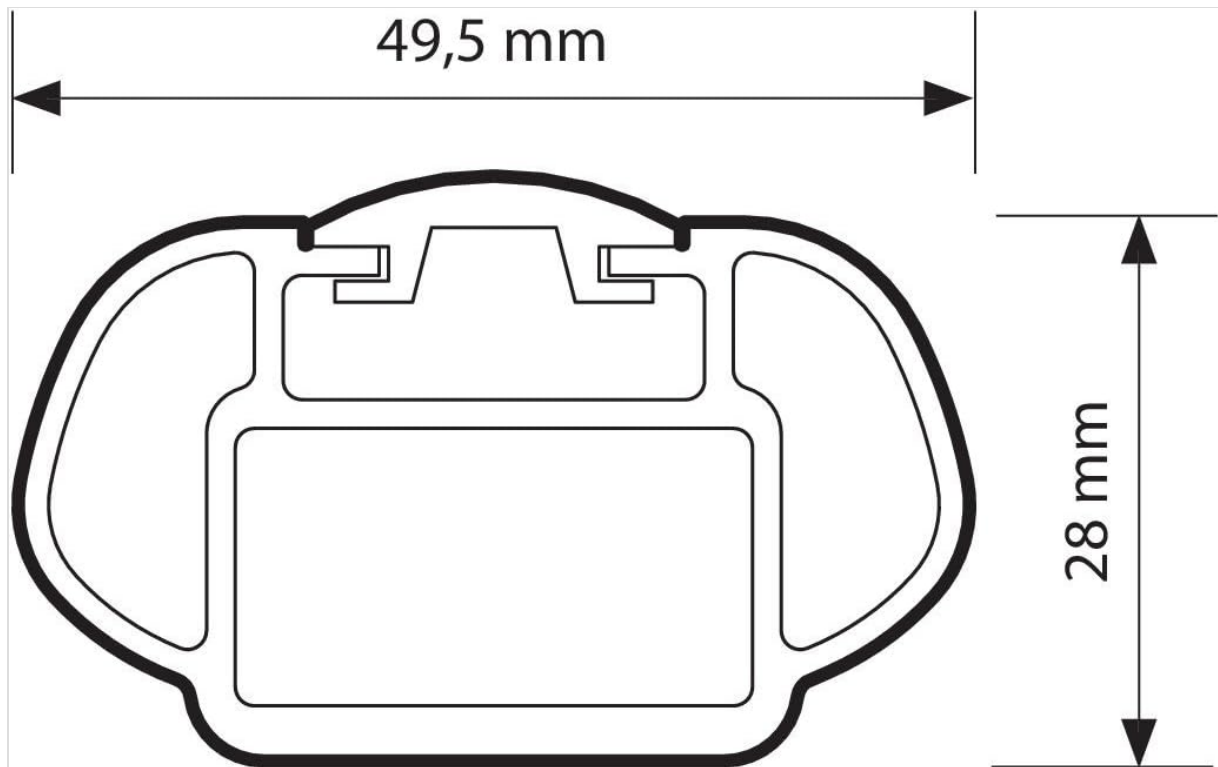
Cross-section diagram of Lampa NORDRIVE N15026 roof bar. This diagram illustrates the internal structure and dimensions of the aluminum profile, showing a width of 49.5 mm and a height of 28 mm. It highlights the upper channel for T-connectors and the lower groove for foot fixings.
